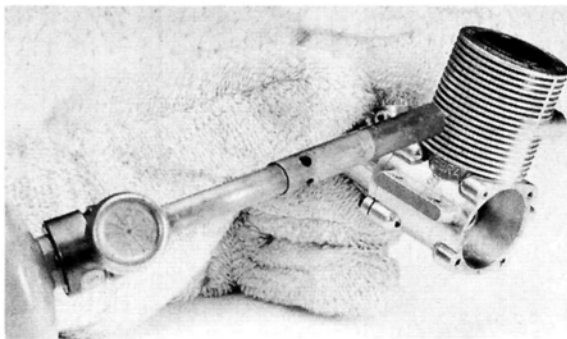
Uniformly heat the upper crankcase with a low flame; hold the engine with an insulated glove (I use High Heat gloves).
